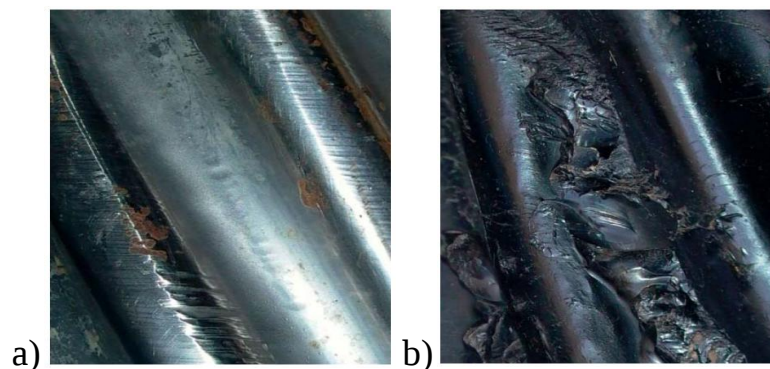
Wear of the surfaces of the working pair: a) the rotor; b) stator plates
